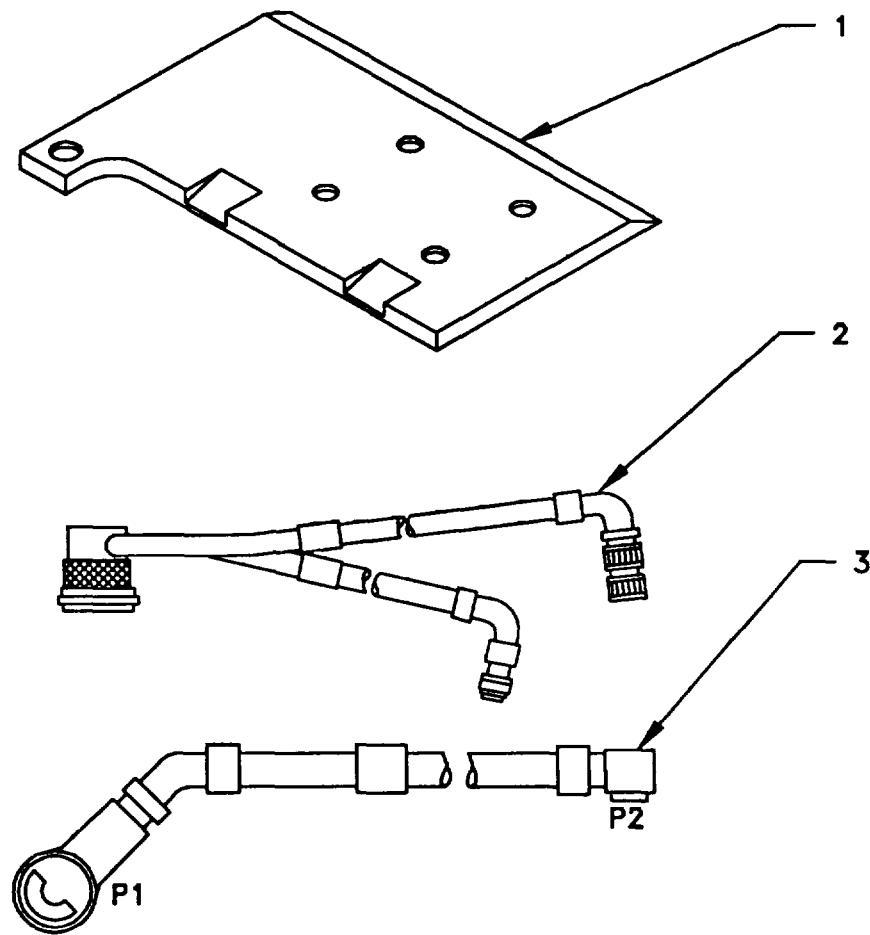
TSEC/KY-57 Illustrated Parts List
